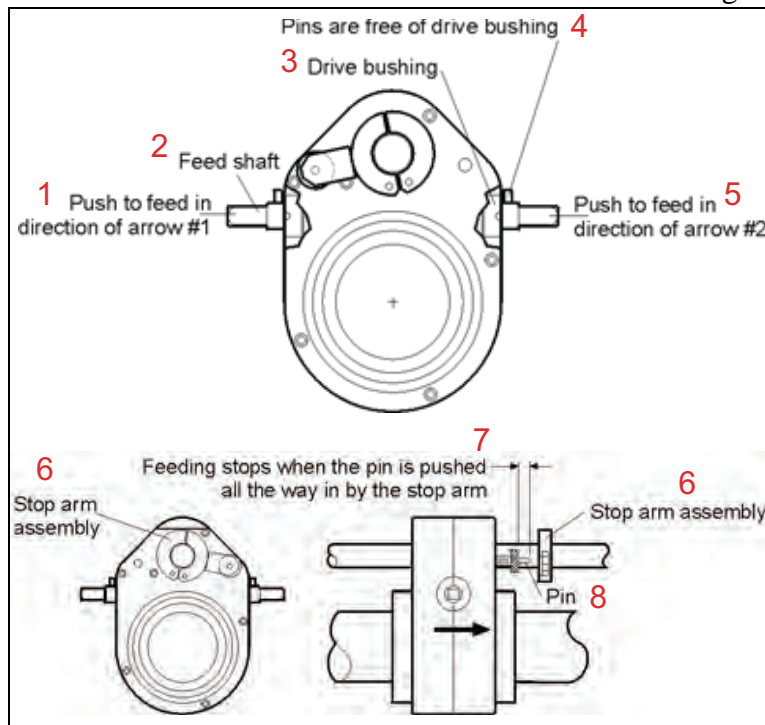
DISENGAGING THE AXIAL FEED
